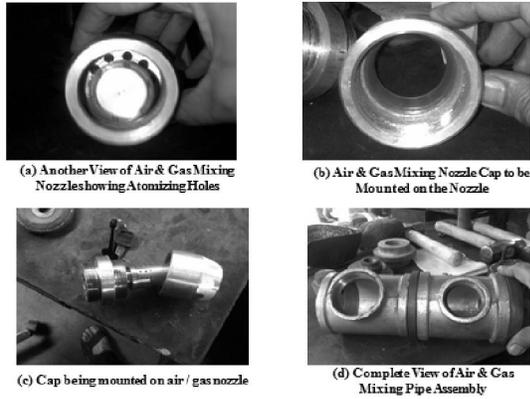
Burner Nozzle / Cap and Brass Housing Fabrication
